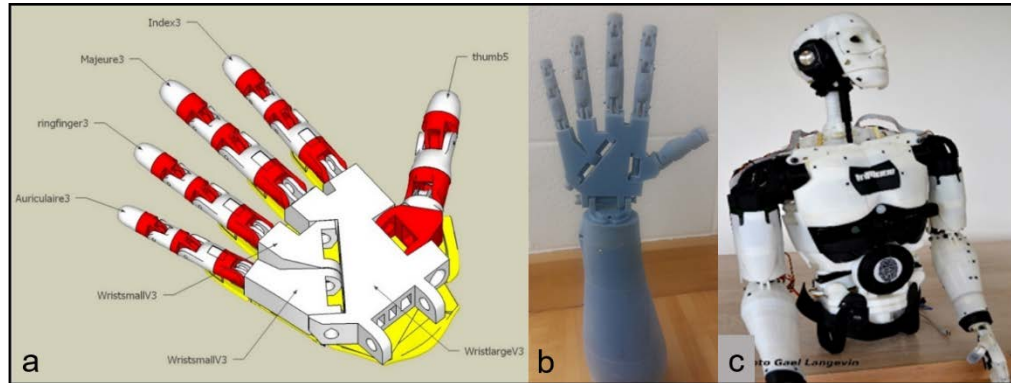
(a) InMoov hand design (b) 3d printed right hand (c) InMoov robot
